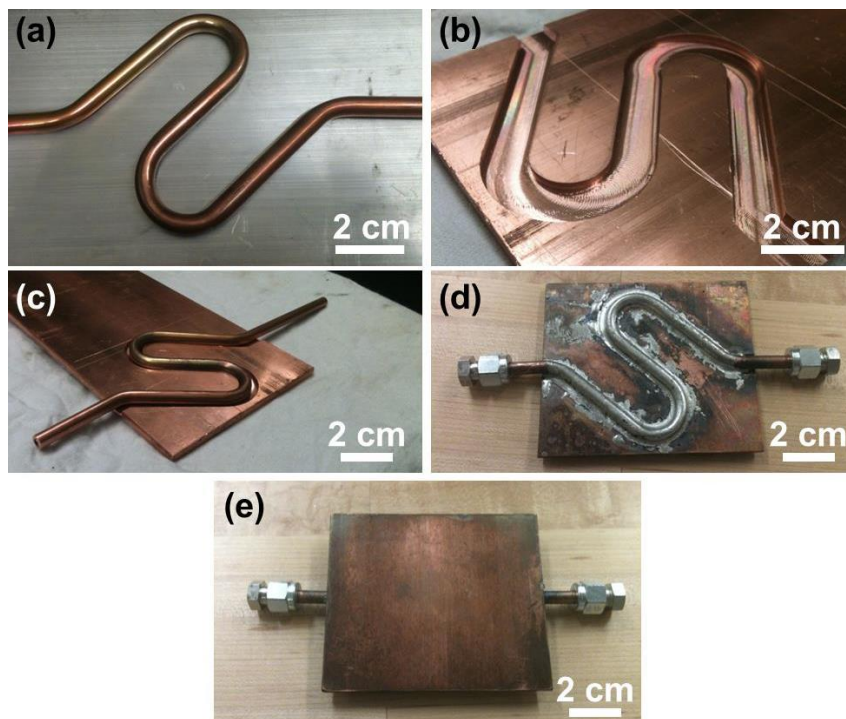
Image of the cold-plate fabrication steps showing (a) 1/4" Cu heat treated tube after bending, (b) milled Cu cold plate block, (c) the tube resting in the milled cold plate block, (d) the cold plate after soldering, and (e) the cold plate front side (opposite of the soldering side).
